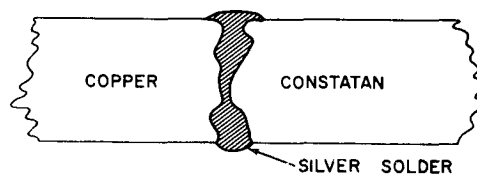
Cross section of a typical butt silver soldered thermocouple.
